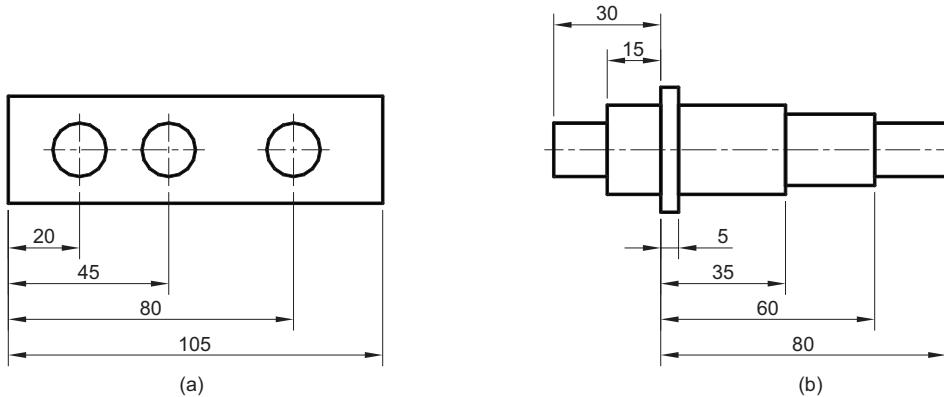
(a) and (b) Progressive or parallel dimensioning
